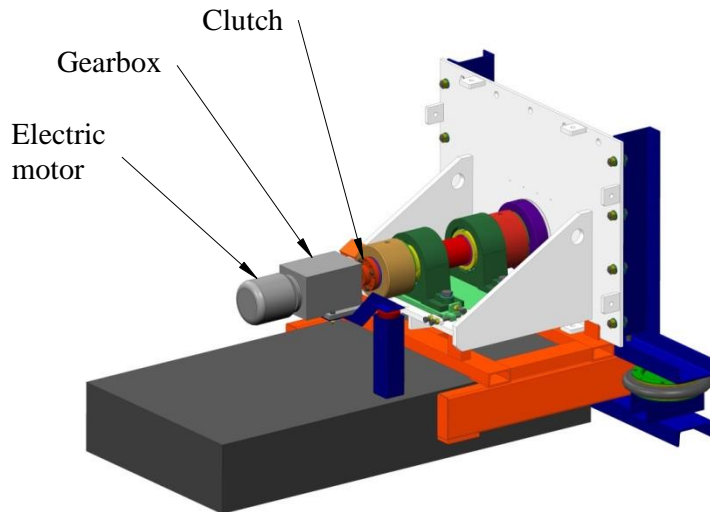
Drive system for the first prototype's sprocket shaft during the fatigue test
